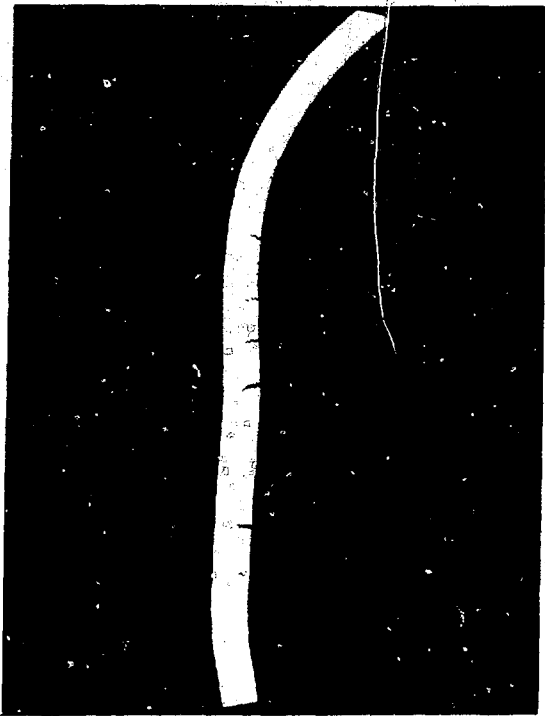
Numerous transverse weld cracks were observed in a reverse bend on the SRP-444 impact face. 10X.
